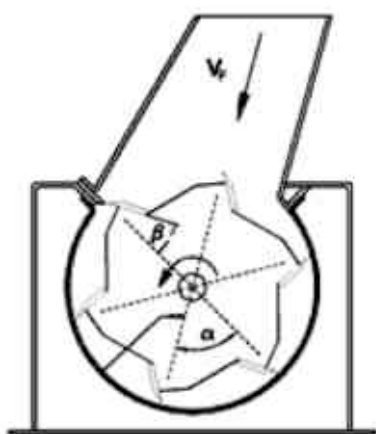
Knife mill with a cylinder-type cutterhead, [19]
